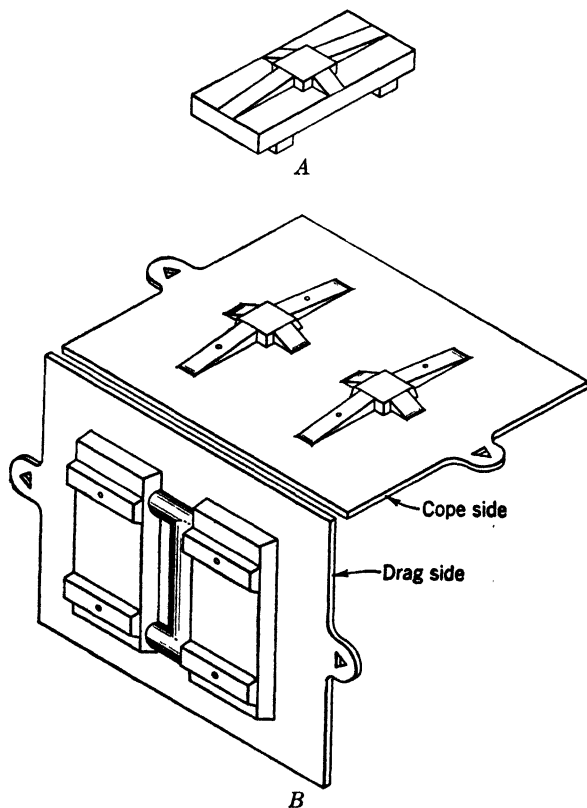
A. Casting. B. Split pattern mounted on a universal match plate.
